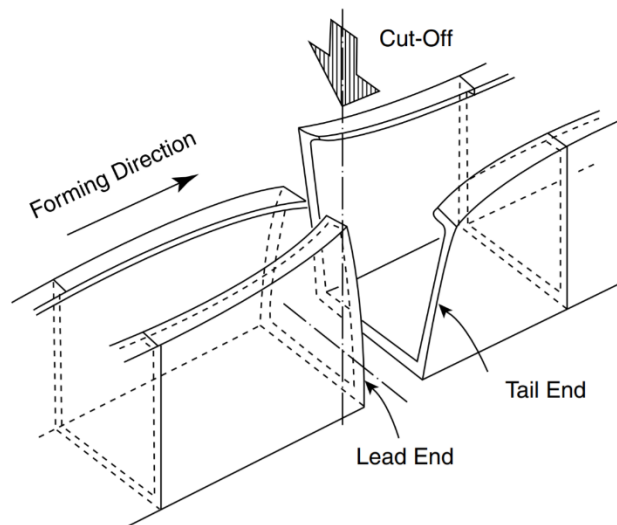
Flaring due to the end cut on the roll-forming process (Halmos, 2006).
